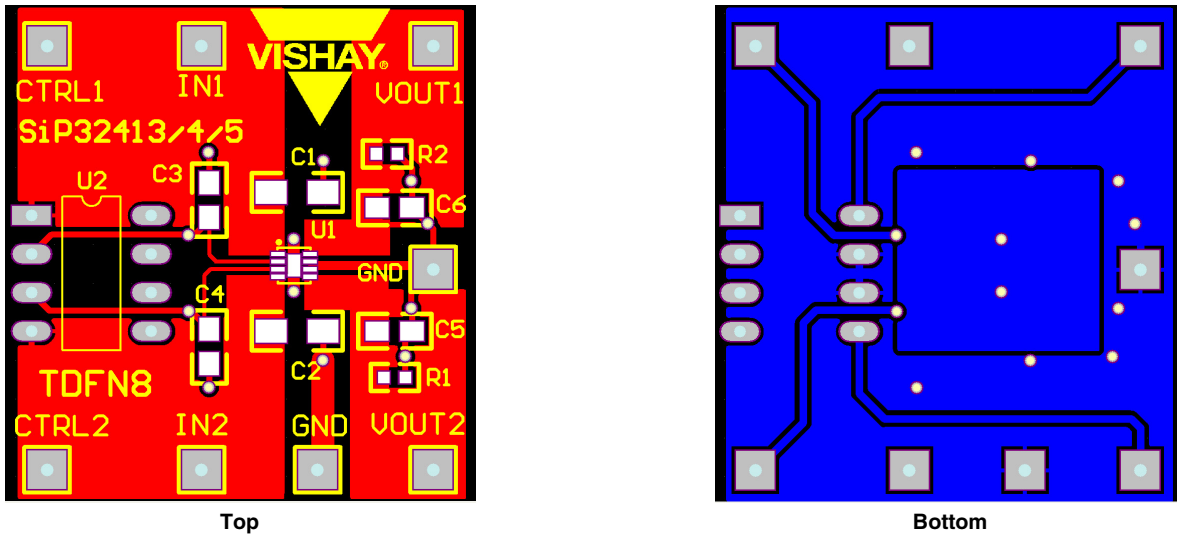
PCB Layout for TDFN8 2 mm x 2 mm (board size: 1.2 inch x 1.3 inch)
